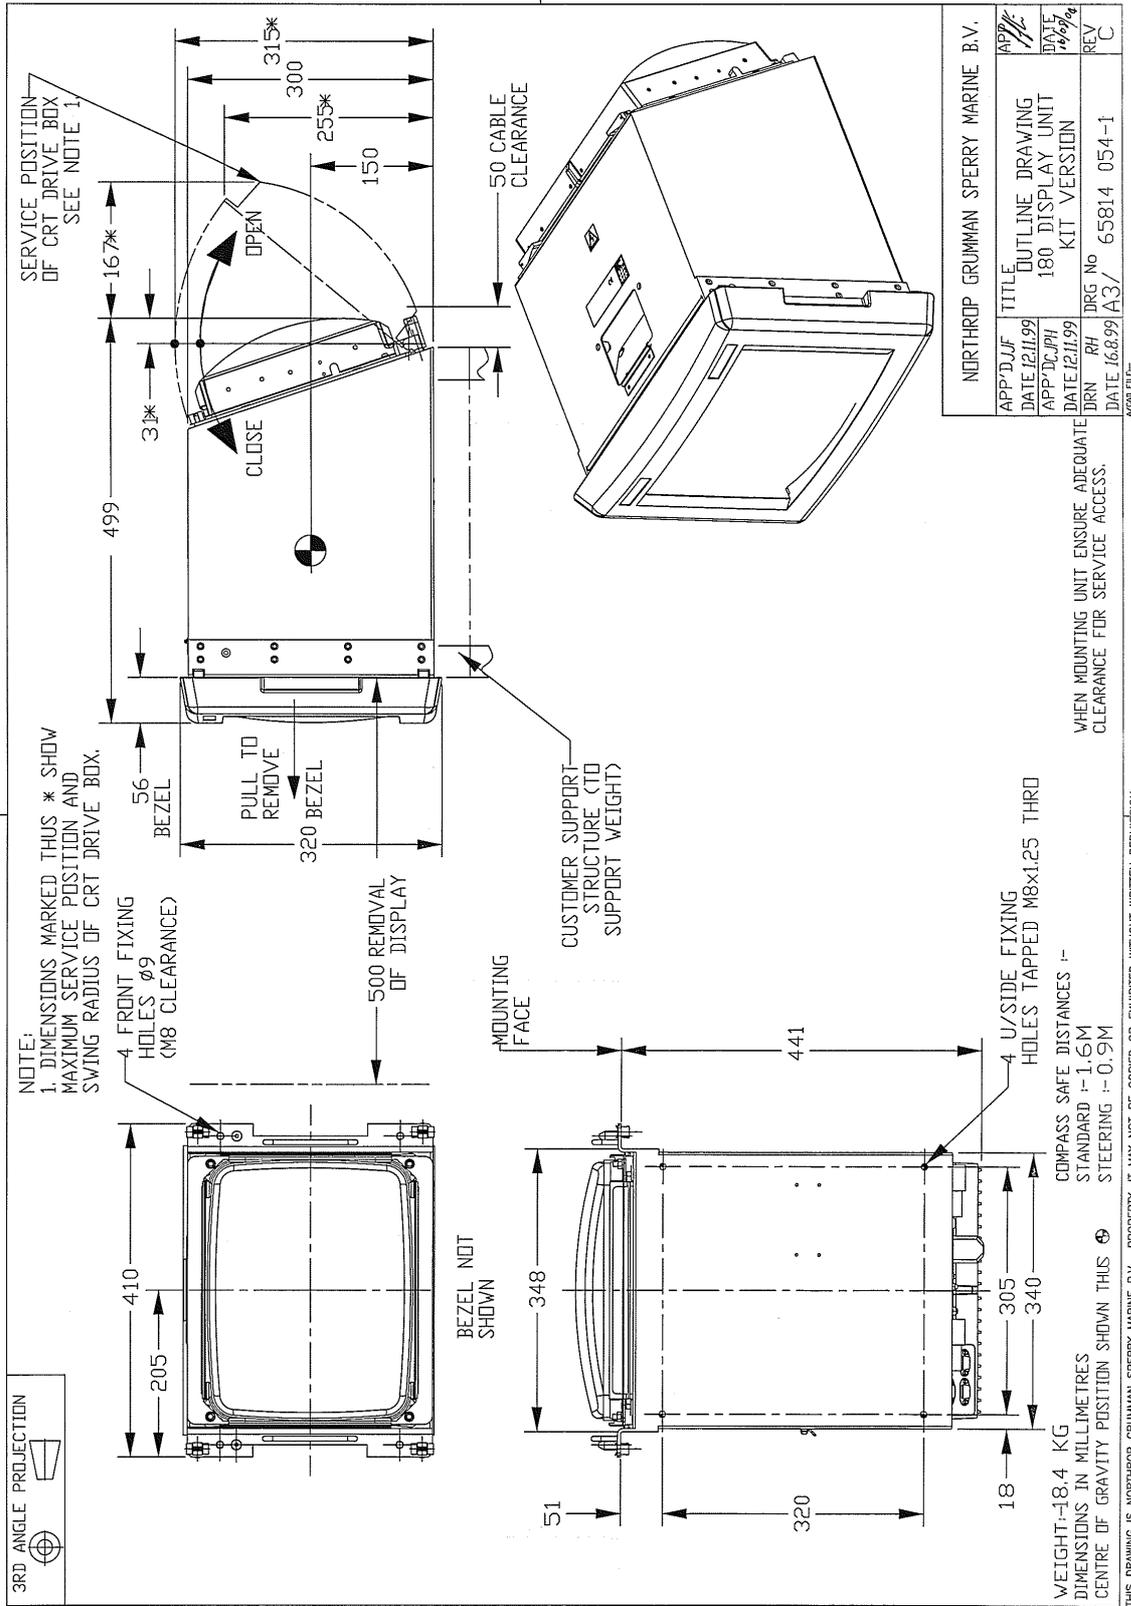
180 Monitor Module (CRT) Outline Drawing
